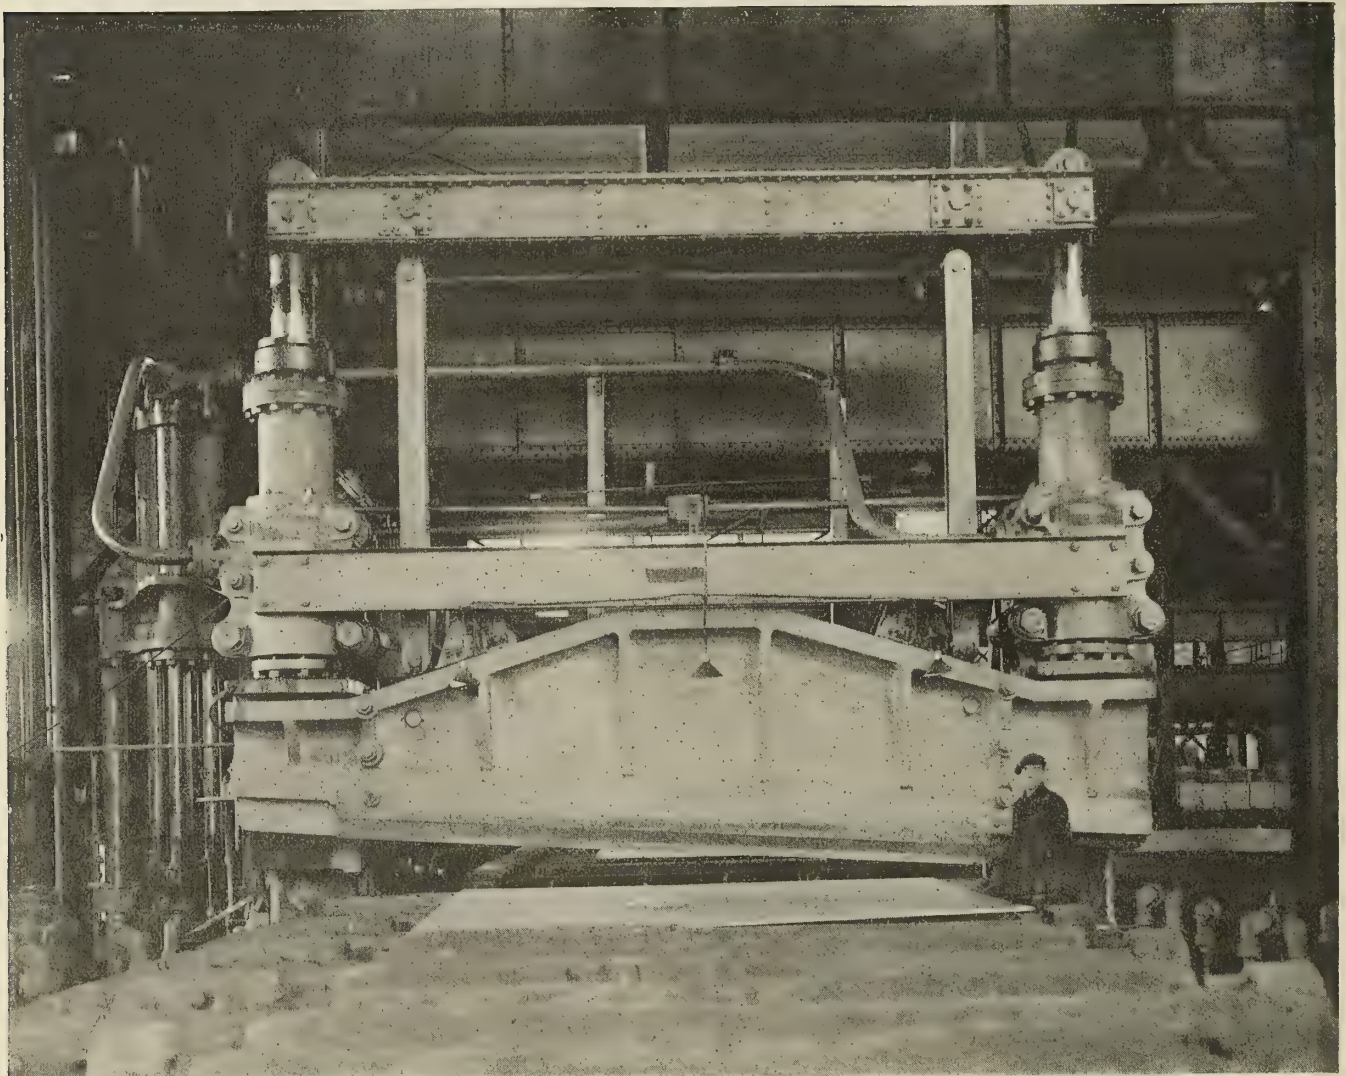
View of Hydraulic Shears Capable of Shearing Material 2 Inches Thick. The Knife is 215 Inches Long; Shears, Between Housings, 210 Inches
